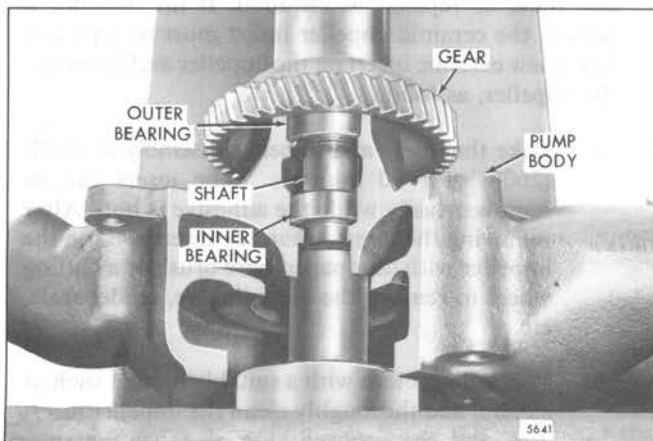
Pressing Gear on Pump Shaft using Tool J 25257
